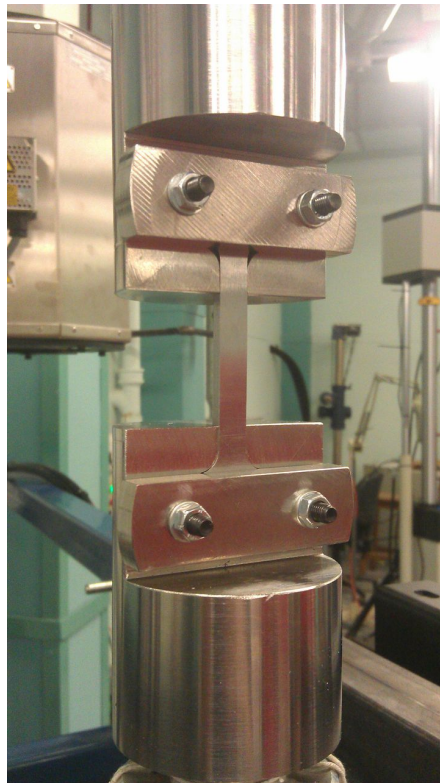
Tensile specimen positioned in custom machined grips - Grips manufactured in-house for use with the Instron 8801 servo-hydraulic fatigue testing system.
